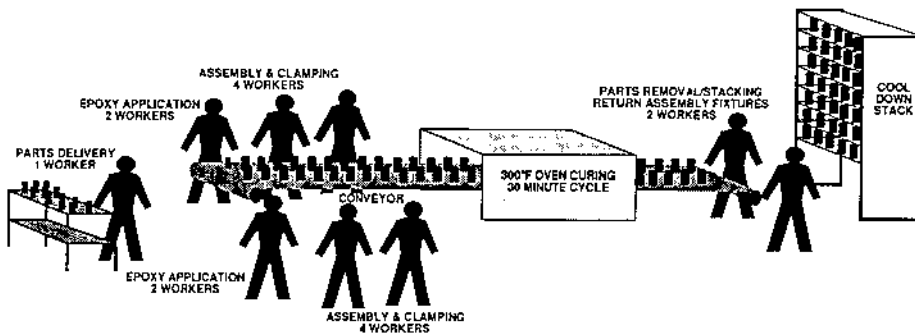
Heat-cured epoxy assembly method. Steps (nine workers): (1) one brings parts to conveyor belt. (2) Two apply epoxy adhesive. (3) Four assemble magnets into housing, attach stainless steel fixturing clamp, place on conveyor belt. (4) Parts are heated to 300°F for 30 min to cure the epoxy. (5) Two workers remove hot parts to cool down stack. Return fixtures to beginning of line. (6) After 24-hr cool down, parts go into the main assembly process.
